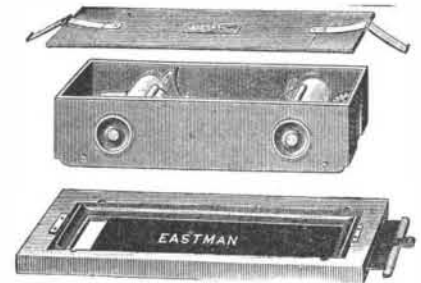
INTERIOR AND SLIDE FRONT OF THE ROLL HOLDER.
